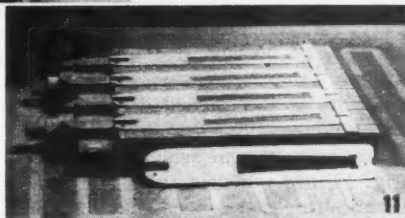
Grinding spacebands on Norton Hydraulic Surface Grinder. The piece is tapered in two directions. Fig. 11—A section of the spaceband grinding fixture, with work in place. One of the pieces is shown resting against the fixture.
